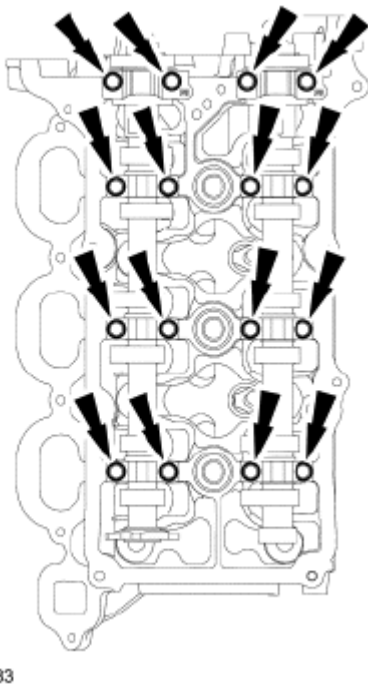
Locating RH Camshaft Bearing Caps And Bolts
